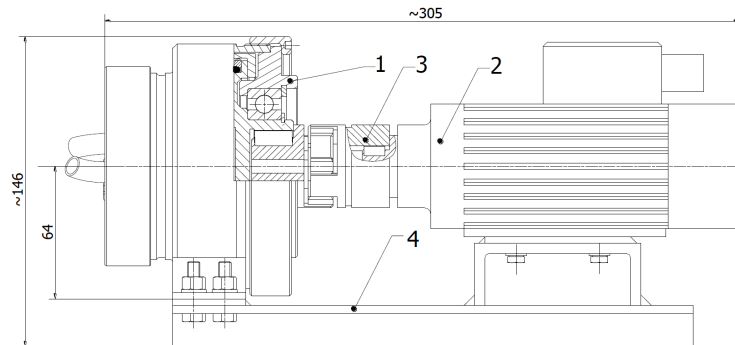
Assembly drawing showing the pumping engine of the PCz 95.7 type [26]:
